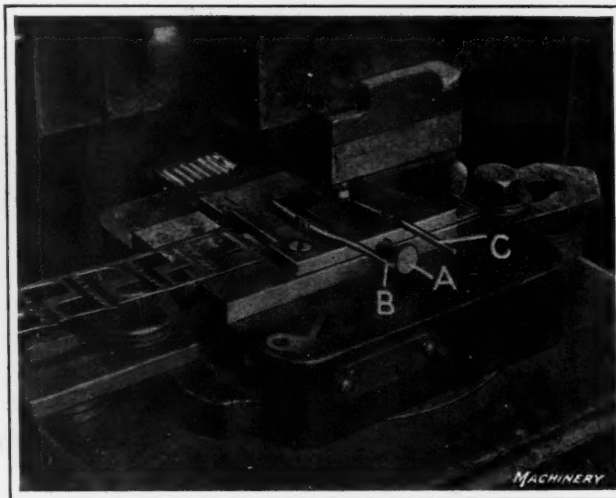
Set-up of Punch Press equipped with the Dies illustrated in Fig. 15
